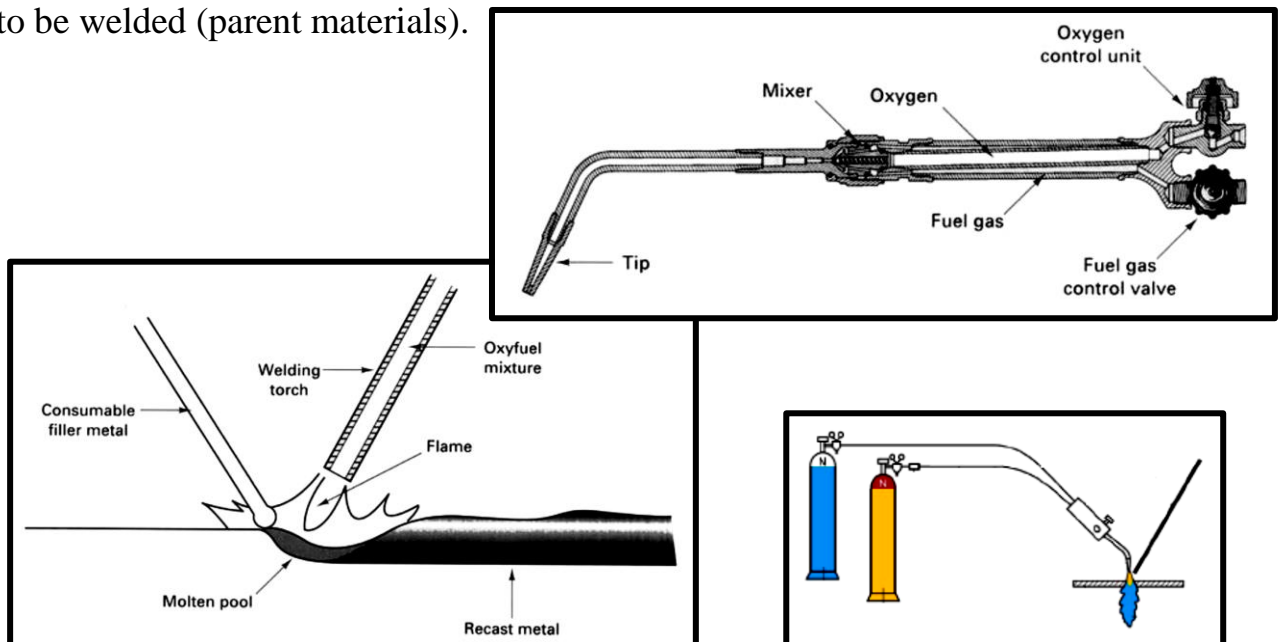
The oxyfuel gas welding theory and arrangements
